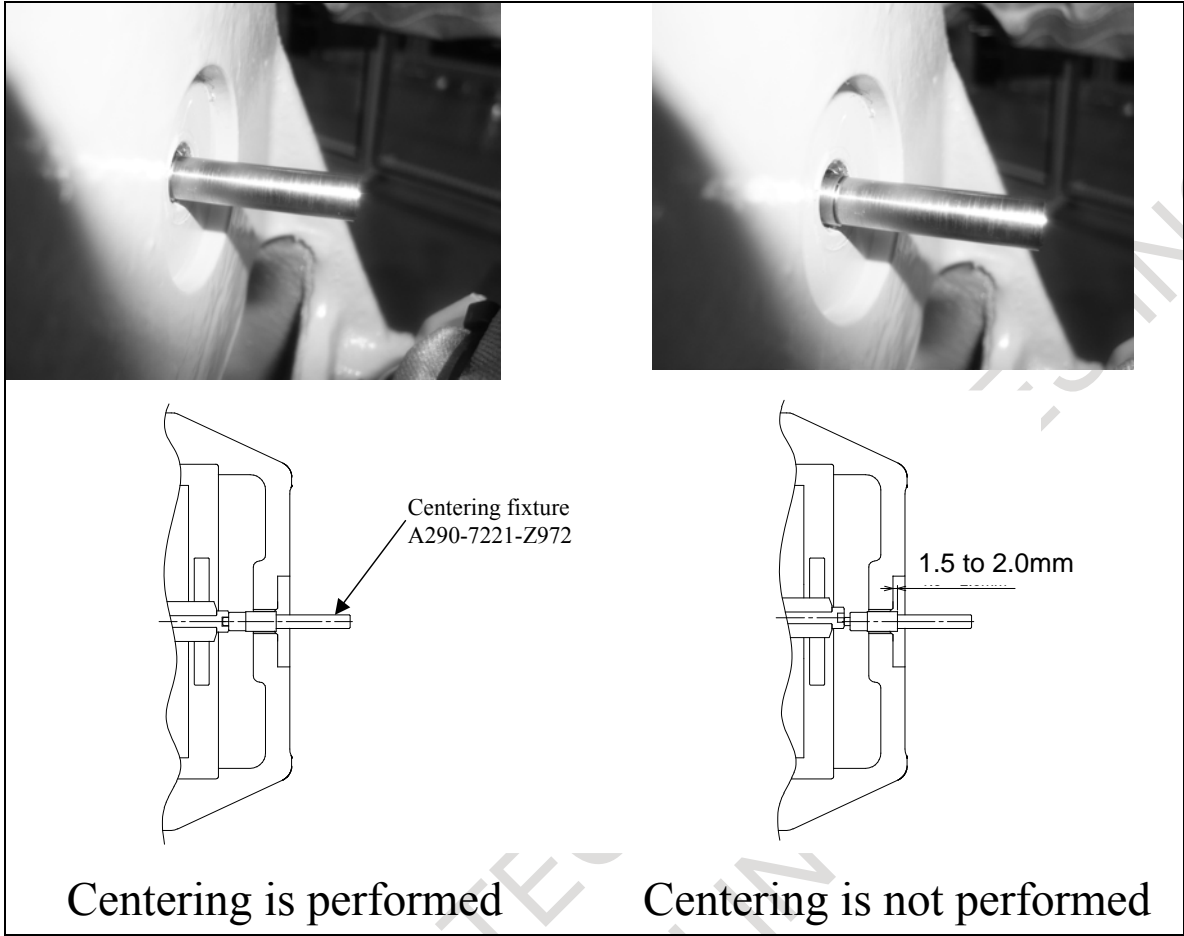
(f) Confirming the gap of the core of J3-axis motor
